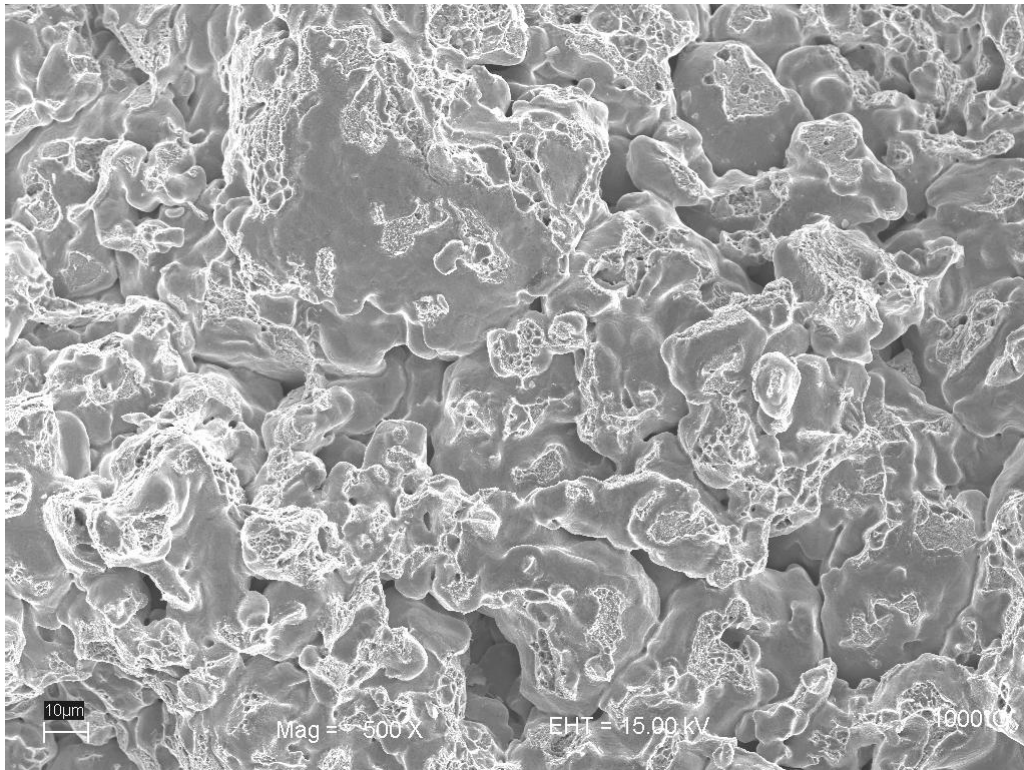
FRACTURE SURFACE OVERVIEW OF A1000-3.
